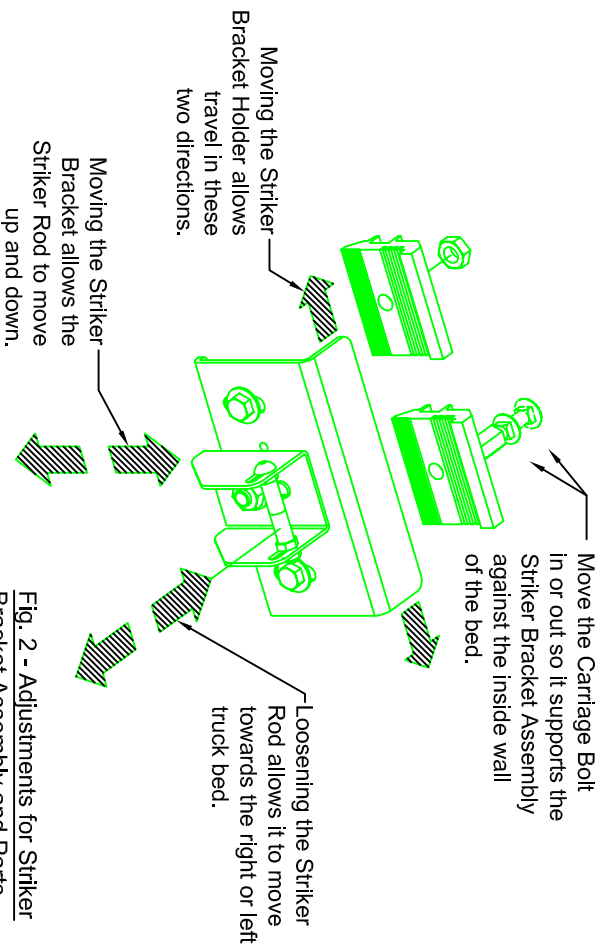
Adjustments for Striker Bracket Assembly and Parts
